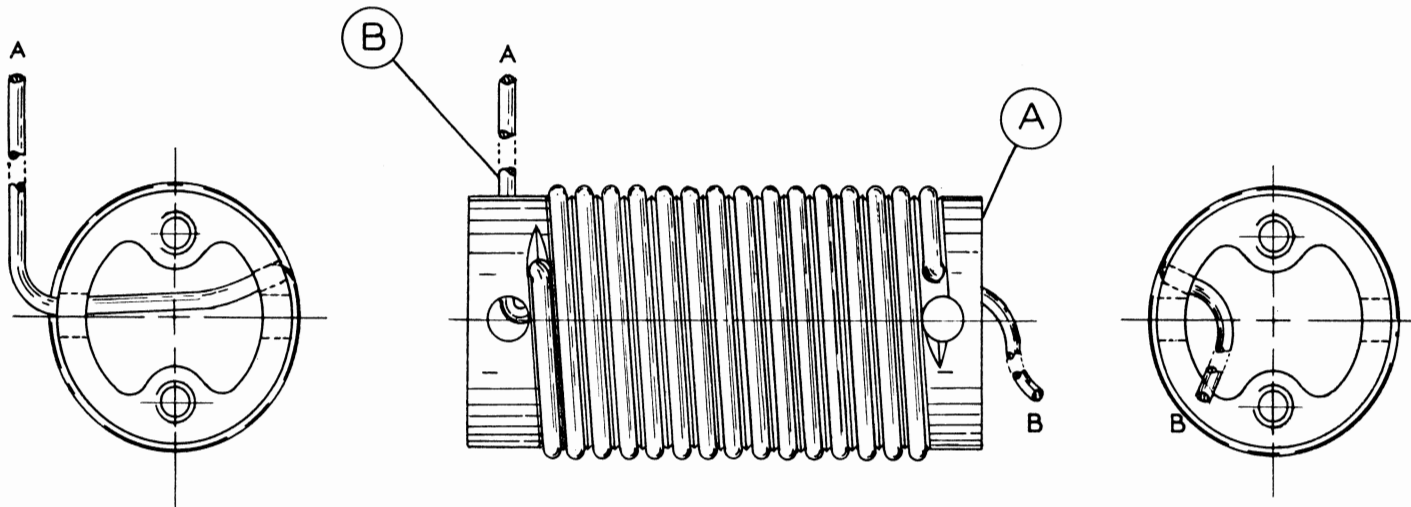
P.A. Plate Tank Padding Inductor L114
